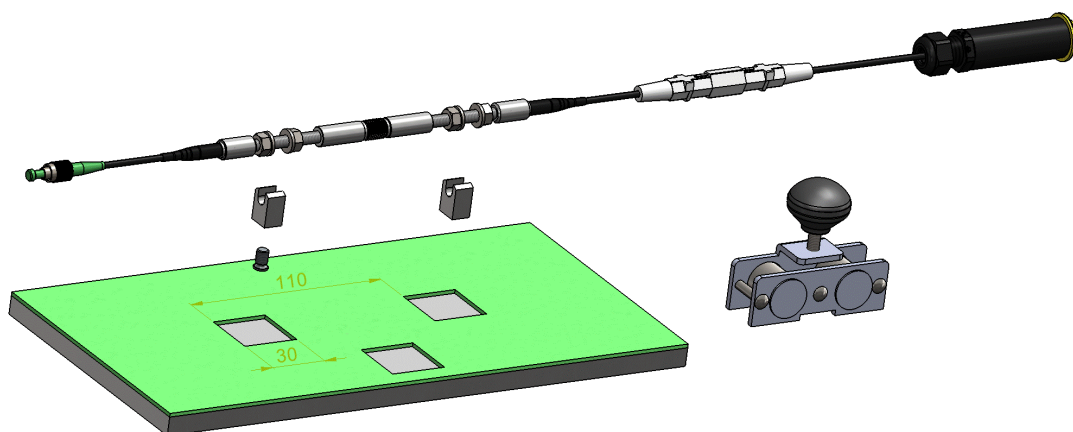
shows the surface preparation for both welding methods. The green color represents a protective layer that needs to be removed.
